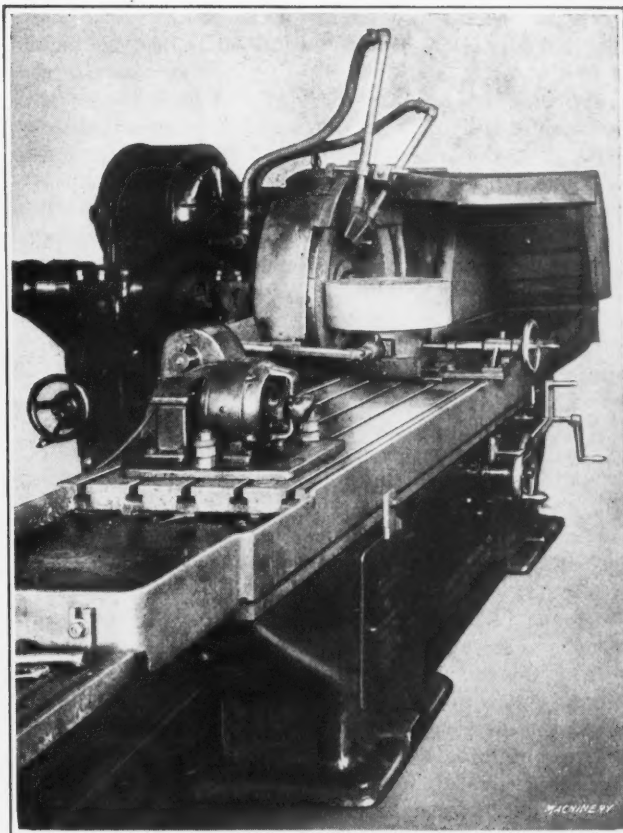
Crowned-pulley Grinding Attachment applied to a Diamond Heavy-duty Face Grinding Machine
